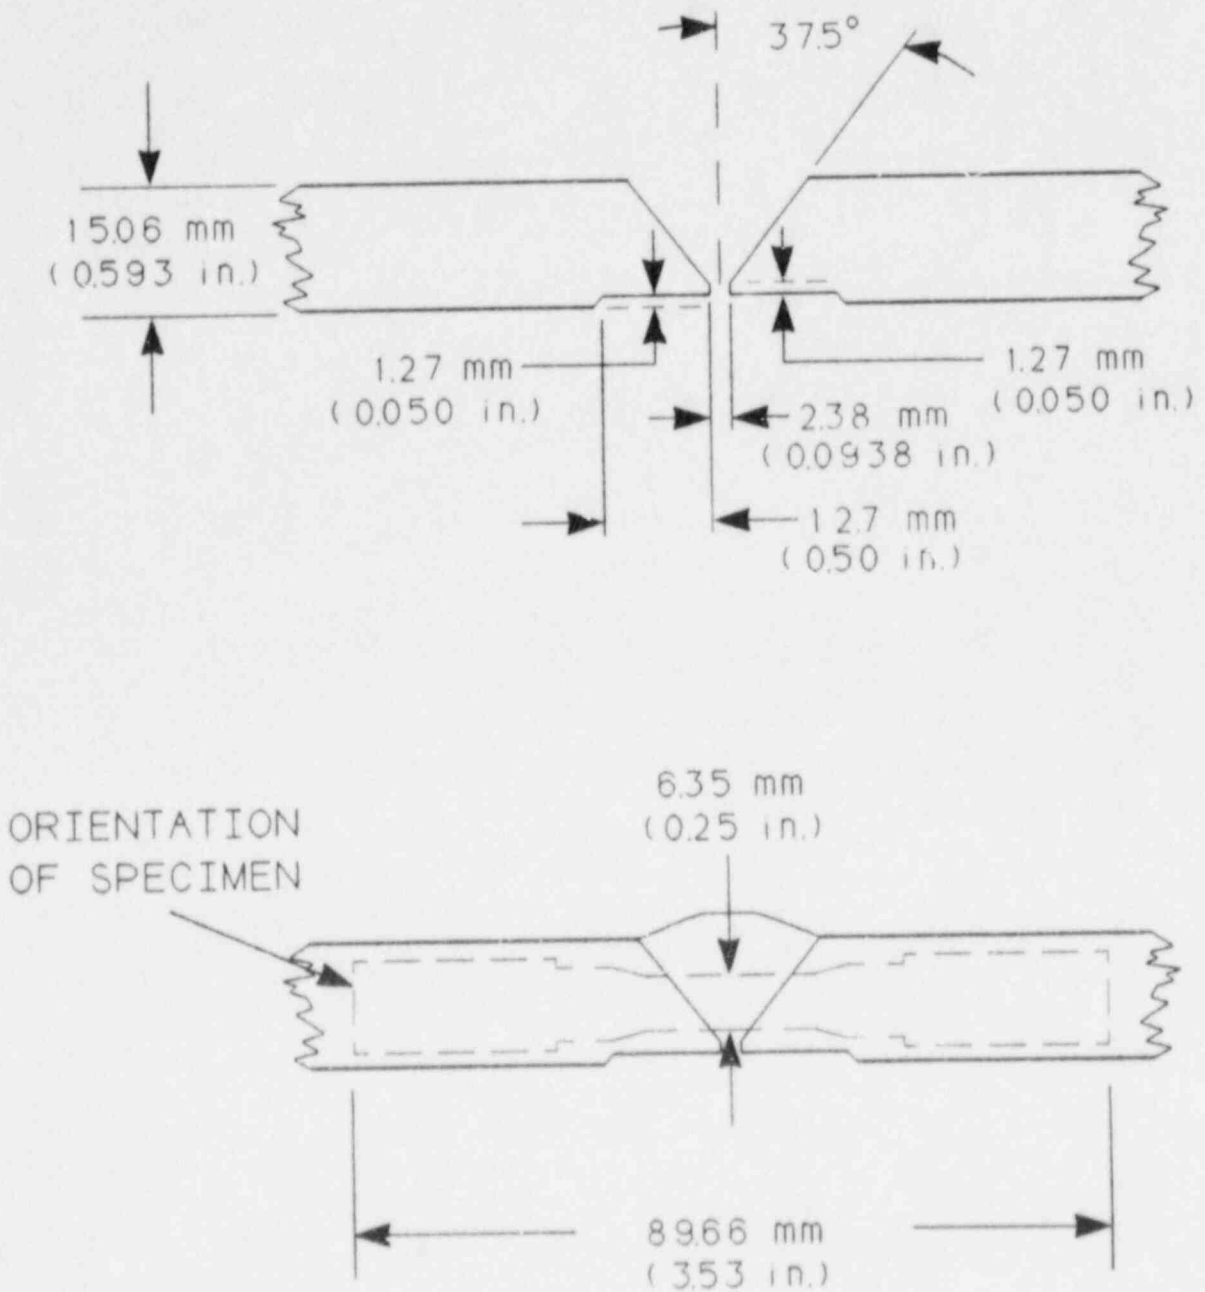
Geometry of girth-butt welded SA 106-B 203 μ m diameter steel pipe. The dotted silhouette shows the orientation of weld metal smooth specimens.
